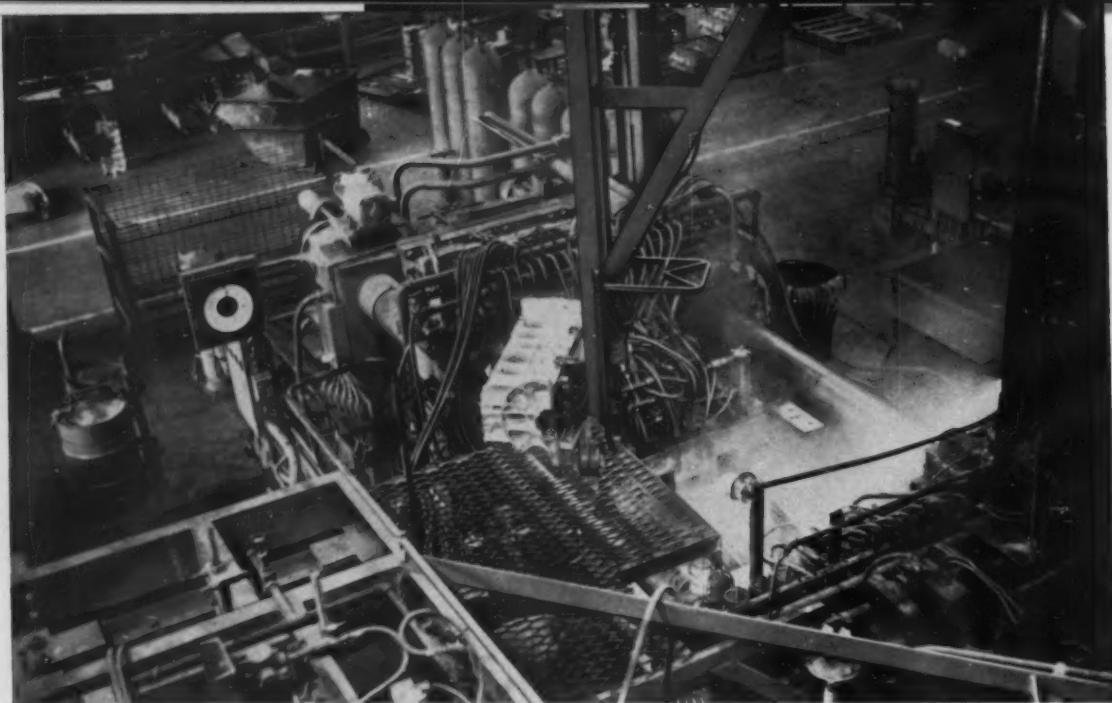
In automatic unloading, the die-cast block is lifted vertically from machine and transferred to inspection table shown in the heading illustration.
